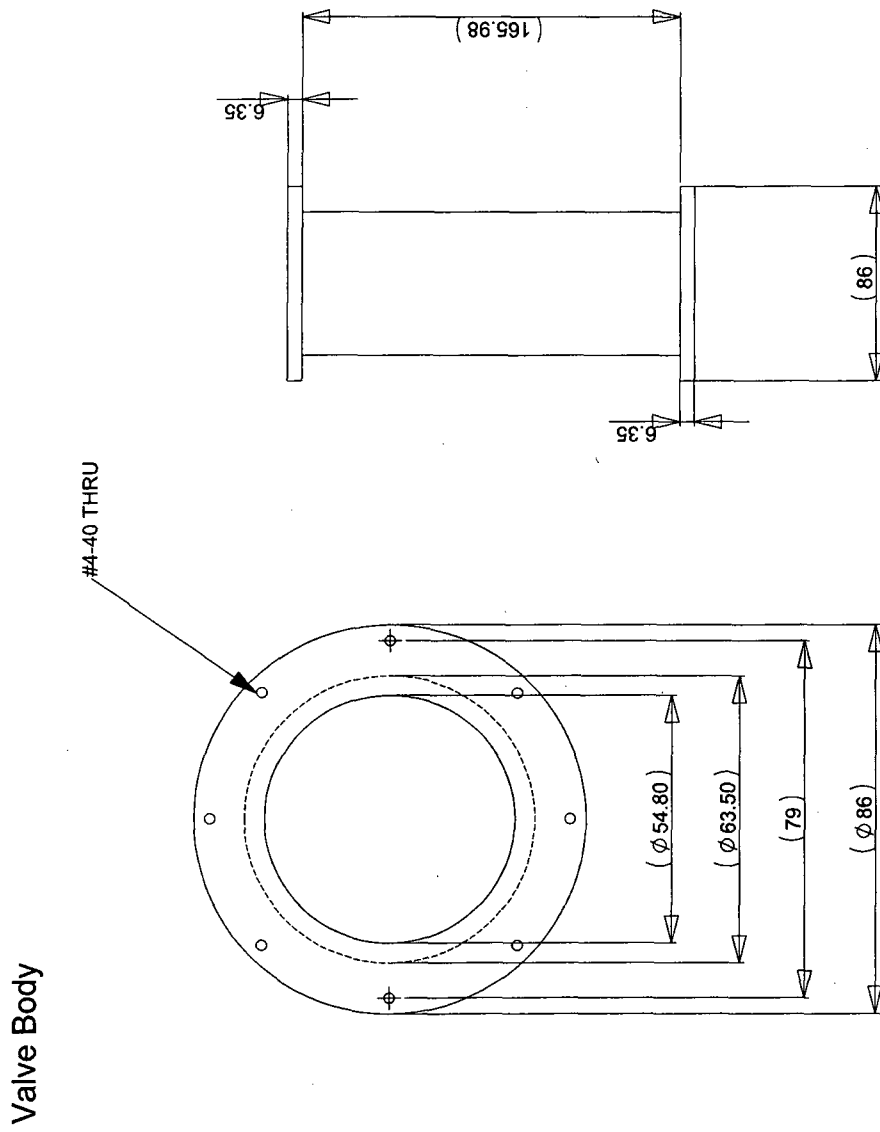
Piezo valve body. The nozzle is bolted to the front, and the back is bolted to the chamber valve flange to hold the valve inside an ISO80F port.
